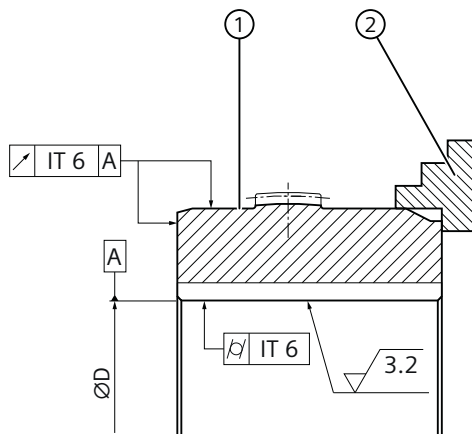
Tolerances for the finished bore in coupling part 1 (1) or 2 (2)
